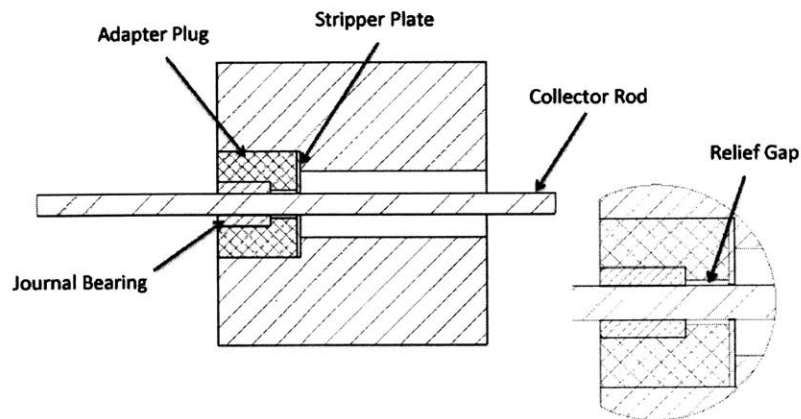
Cut-away view of stripper plate and bearing surfaces
